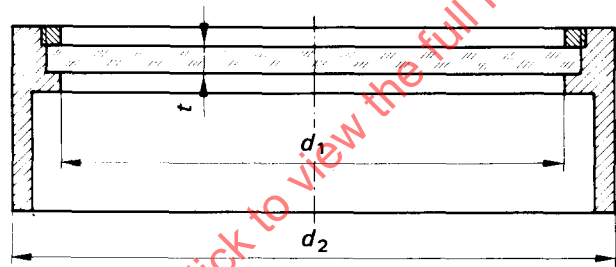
Non-opening side scuttle without deadlight, welded
